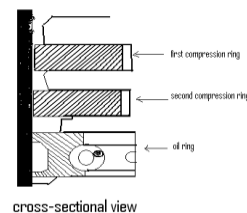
Cross Section View of the Piston Ring [10]
